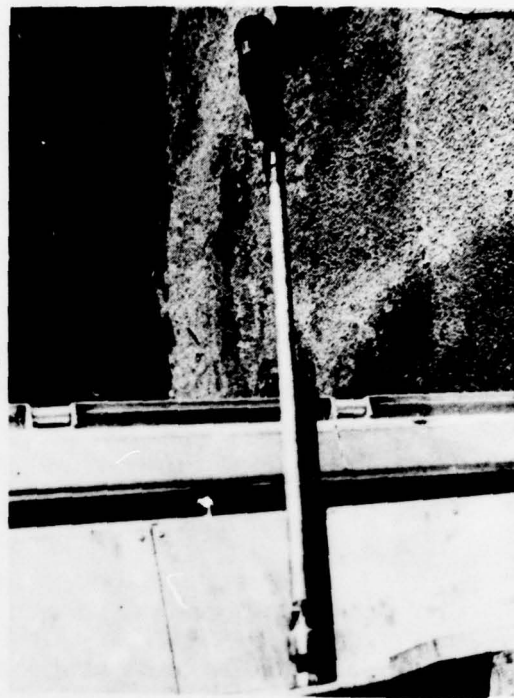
1-1/2" Socket, 36" Extension and Impact Wrench During Jam Nut Installation On 155MM Projectile Load
